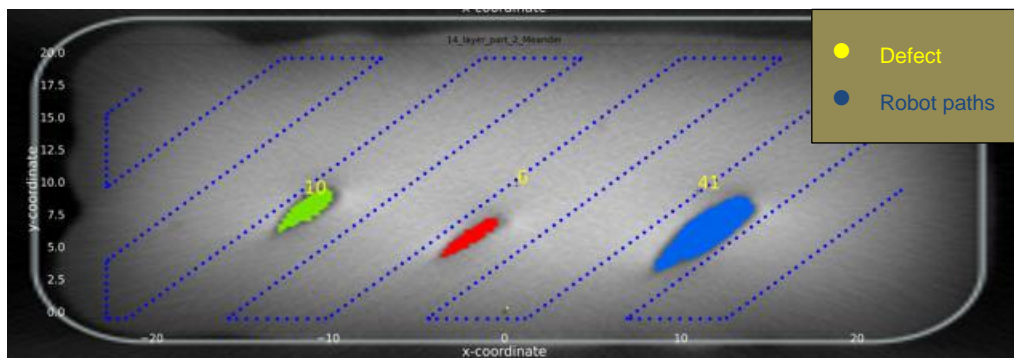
XY cross-sectional view wall no. 3 (CT scan).
